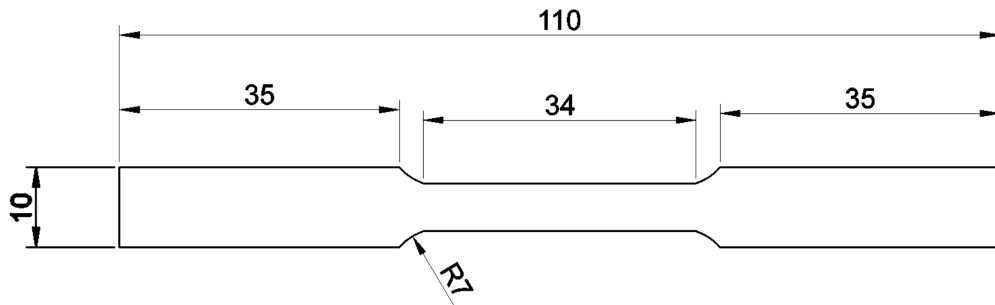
Dimensions of the tensile sample used with all the dimensions in mm.
